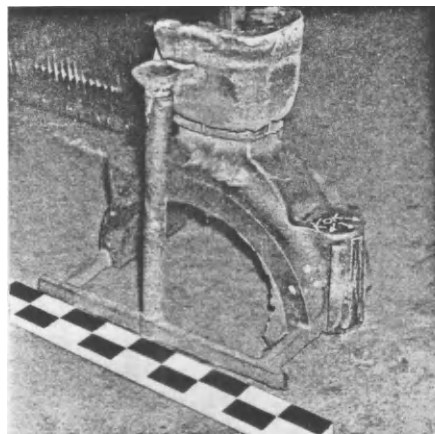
The massive eye lugs are cooled with chills. (This casting is not identical with that shown in Fig. 126b.)
